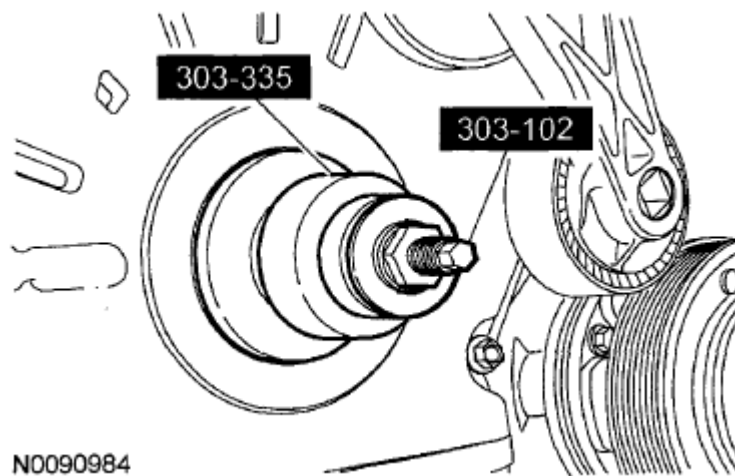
Using Special Tool To Install Crankshaft Front Seal
